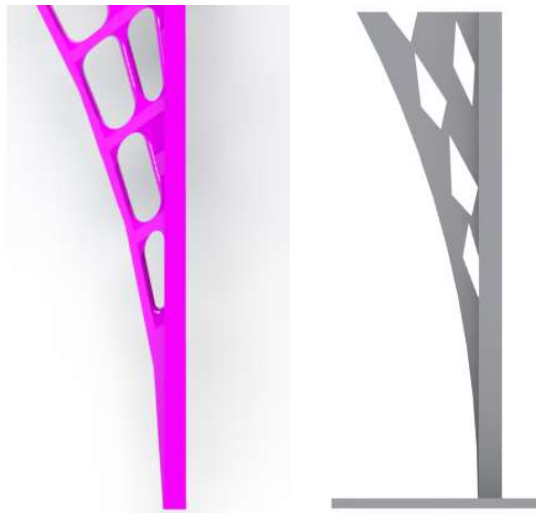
CAD comparison between the part to be achieved and the part actually deposited (a) Part to be achieved (b) Final part
